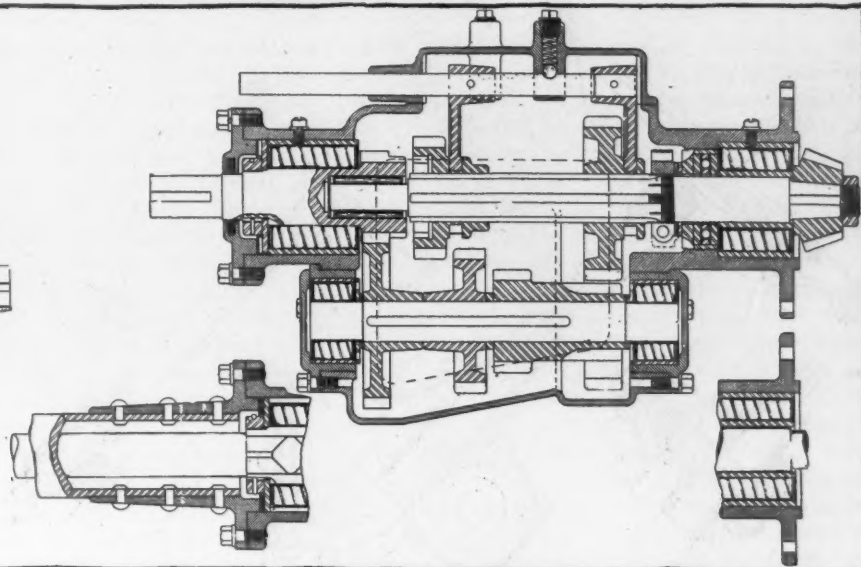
TRANSMISSION GEARSET OF MUNCIE GEAR WORKS
